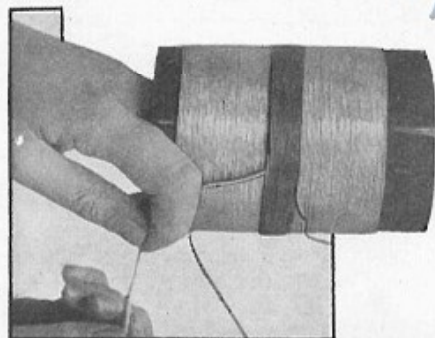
Showing the fixing, beginning, and ending of primary winding of the coil.
